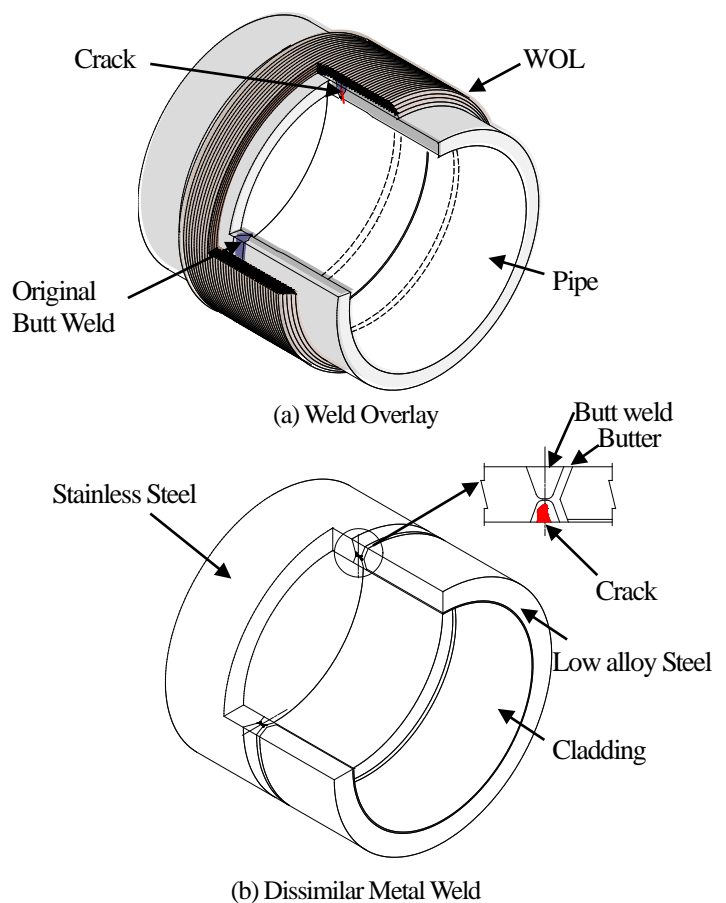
Overview of Weld overlay and Dissimilar Metal weld
